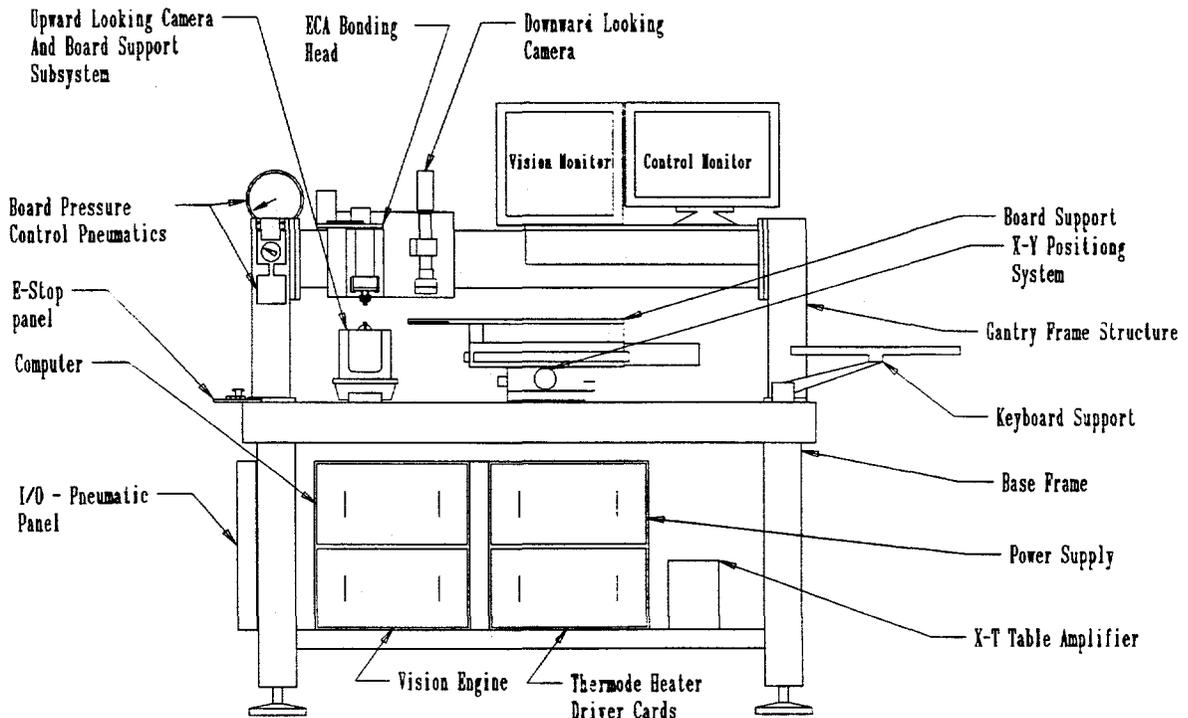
Front View of the Automated PMC Chip Bonding Test System
